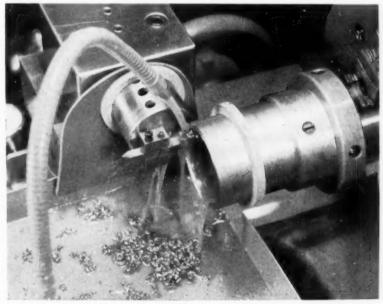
Lathe setup to measure forces and finishes for cutting fluid evaluation.
